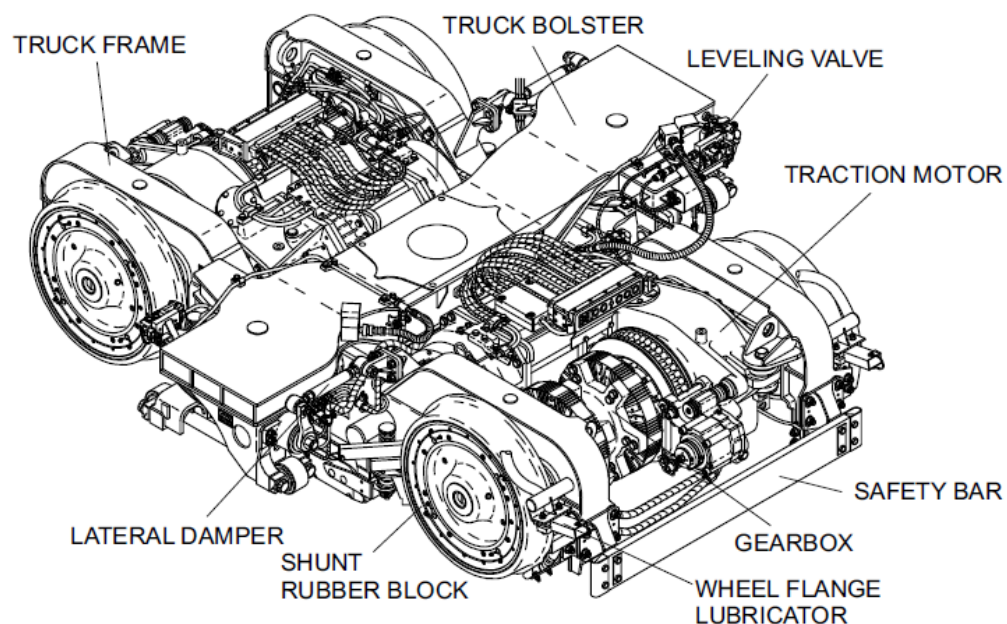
Motor Truck Assembly – Courtesy of Santa Clara VTA LRV
